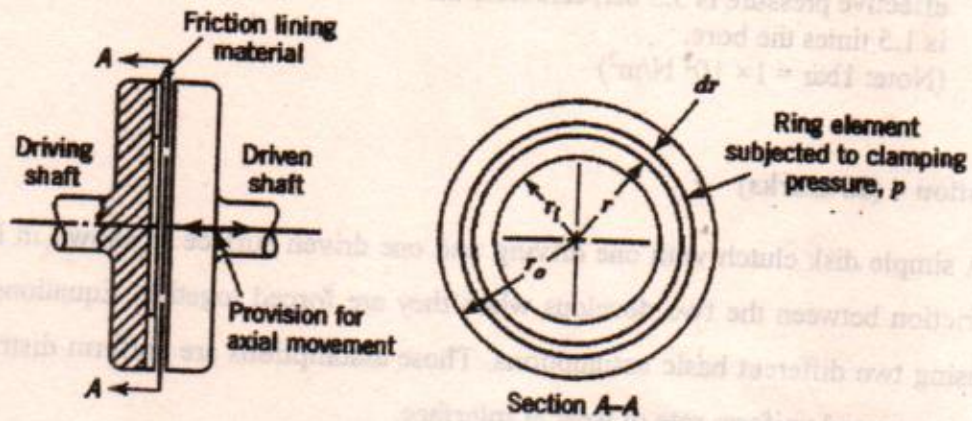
Front view and plane view of Section A-A of disc clutch.
